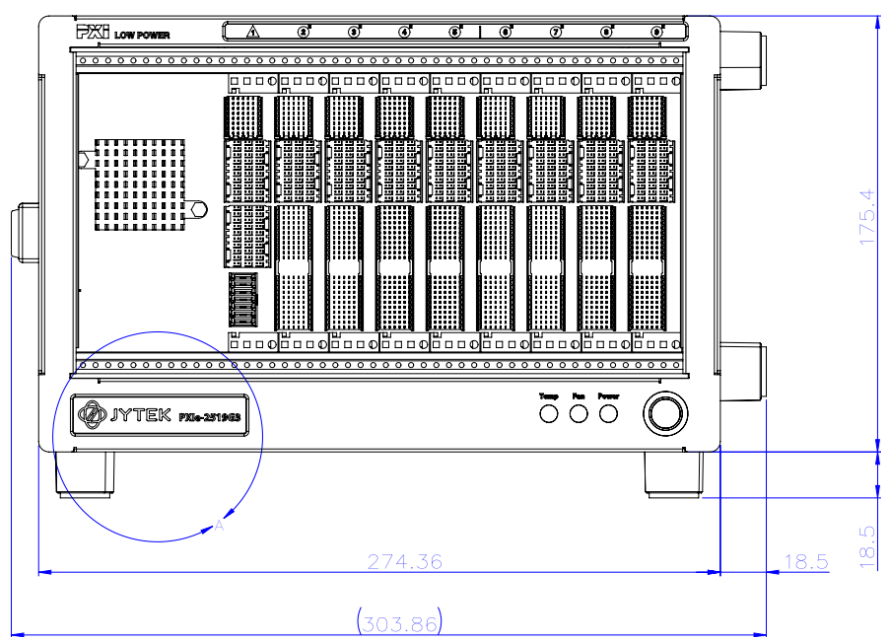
Front View (PXIe-2519 Gen 3/Gen 2)
